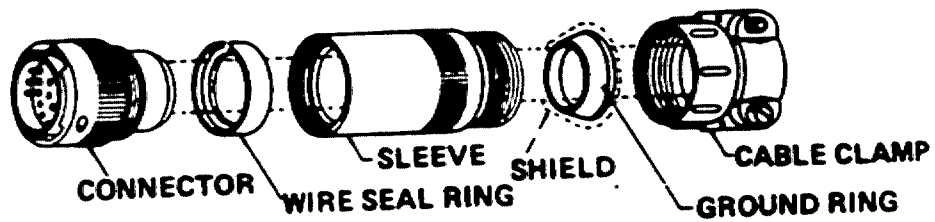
Shield Termination Using Threaded Assembly. [G-1]
